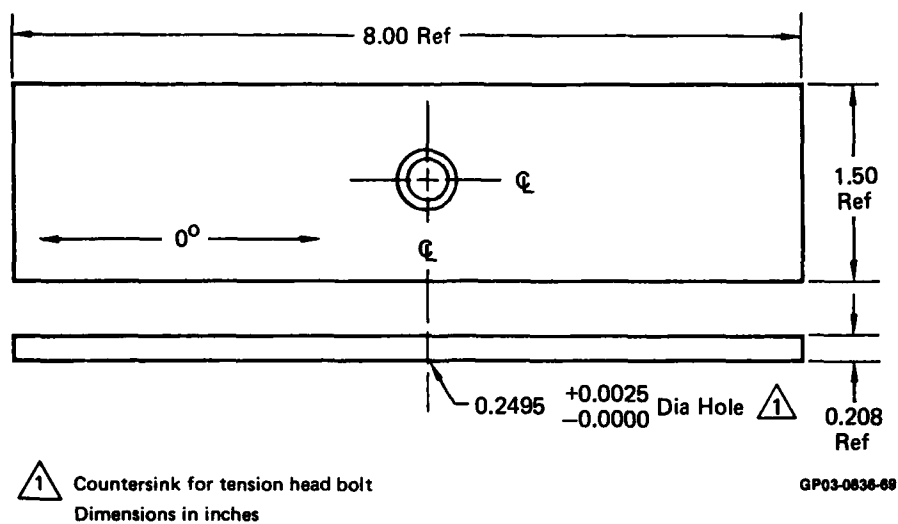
Test Specimen - Unloaded Hole, Fatigue Test (UHFT)
